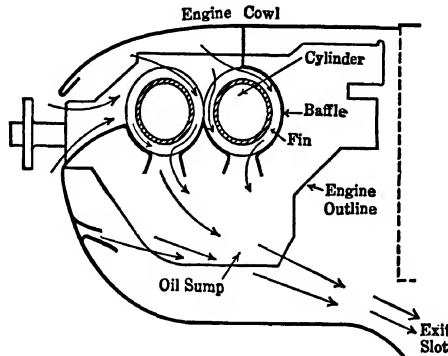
Cowling and pressure baffles for horizontally opposed airplane engine.
